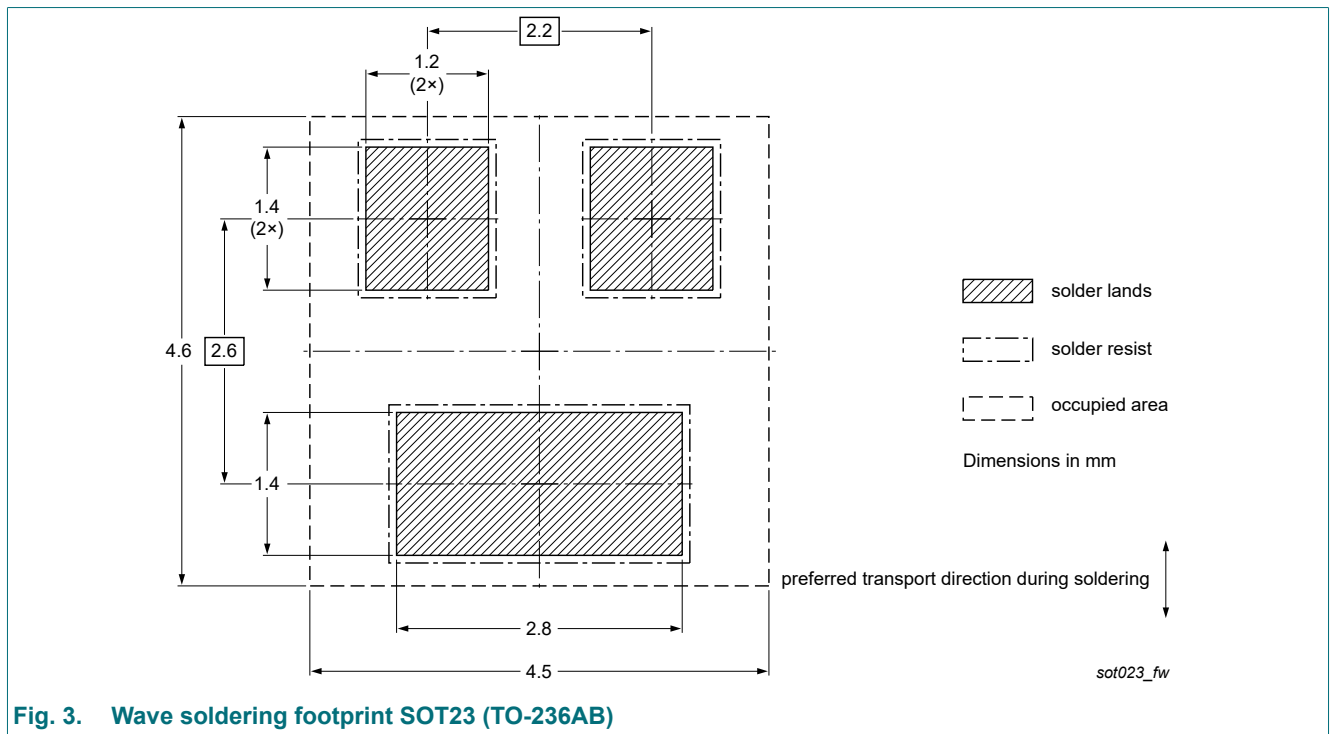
Wave soldering footprint SOT23 (TO-236AB)
